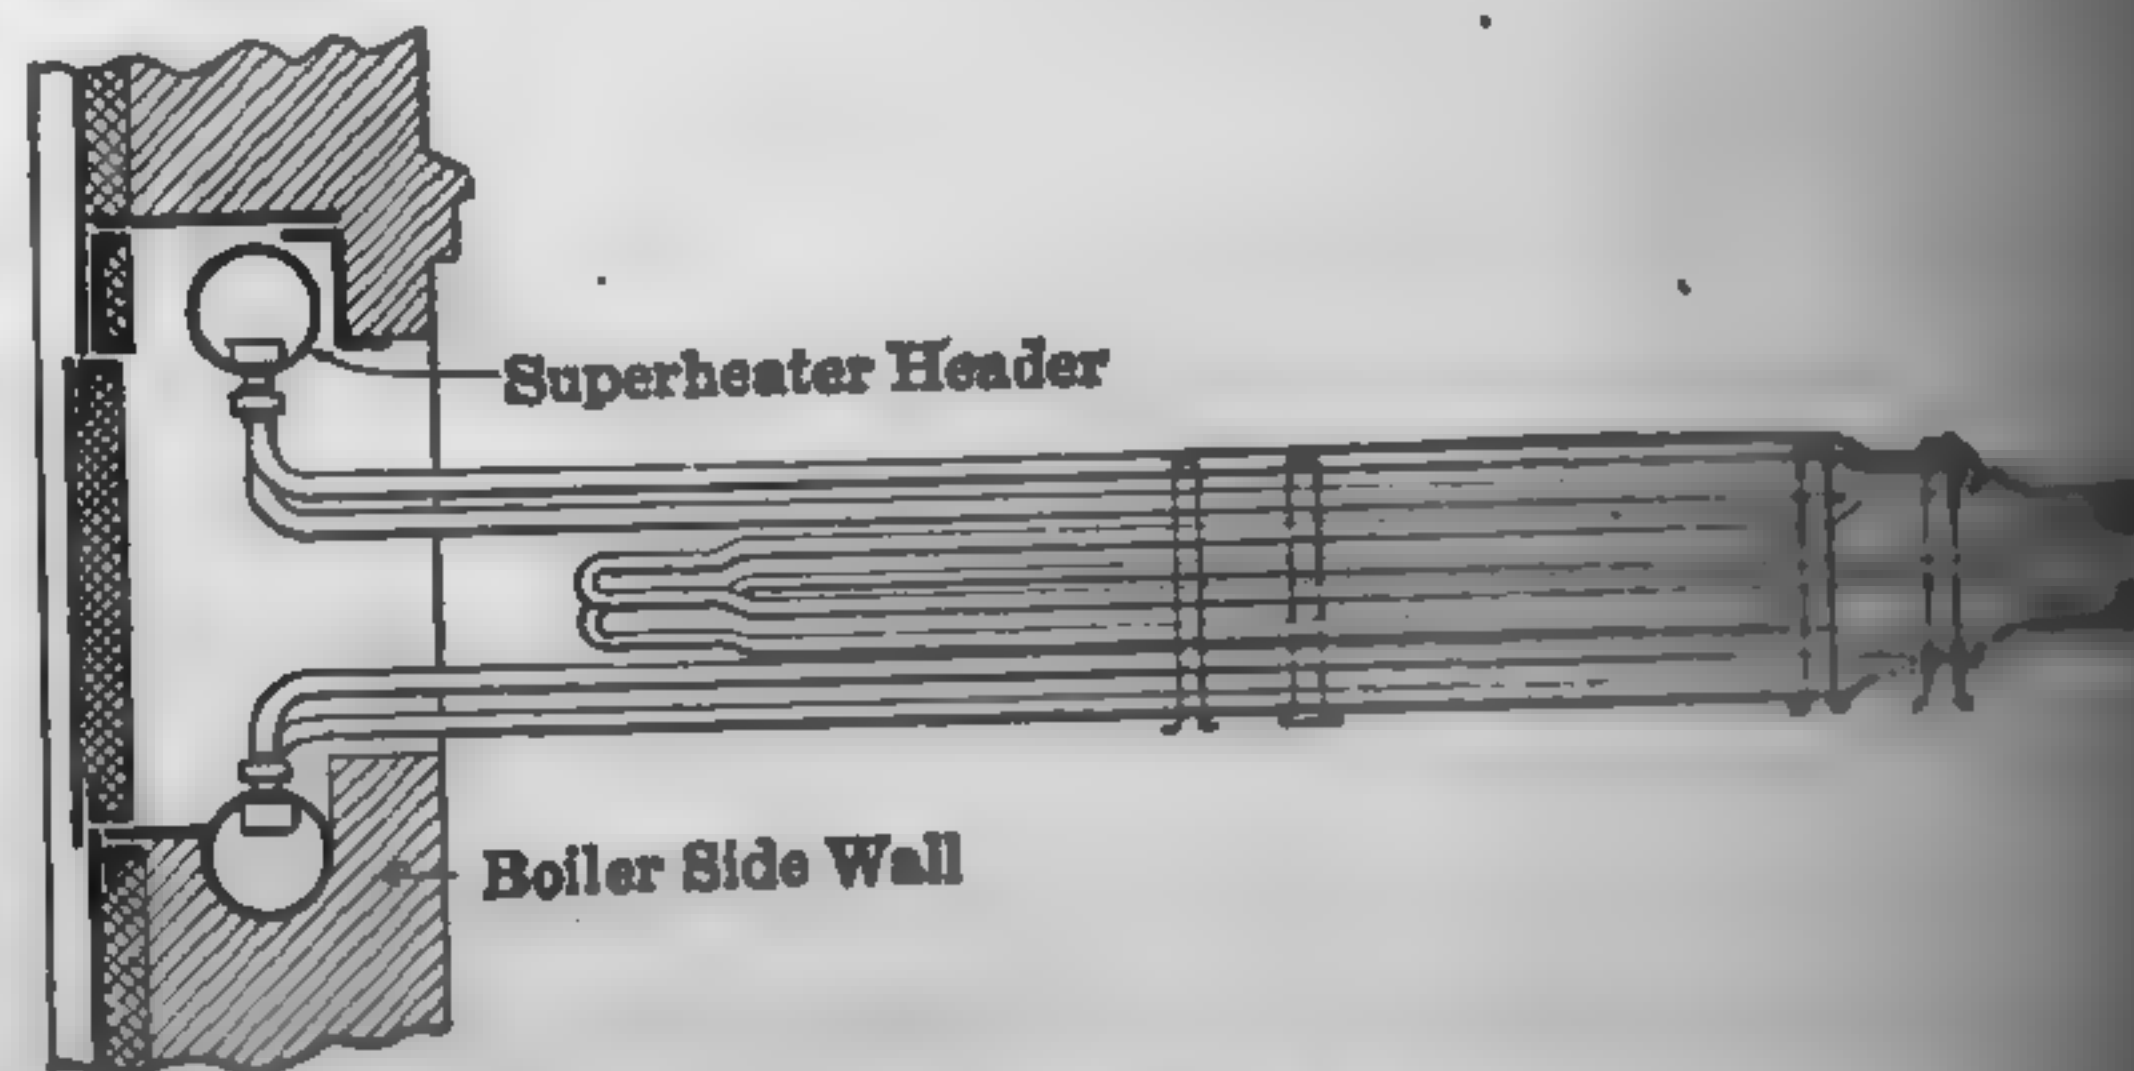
Assembly of Elesco Superheater — Side Elevation.
